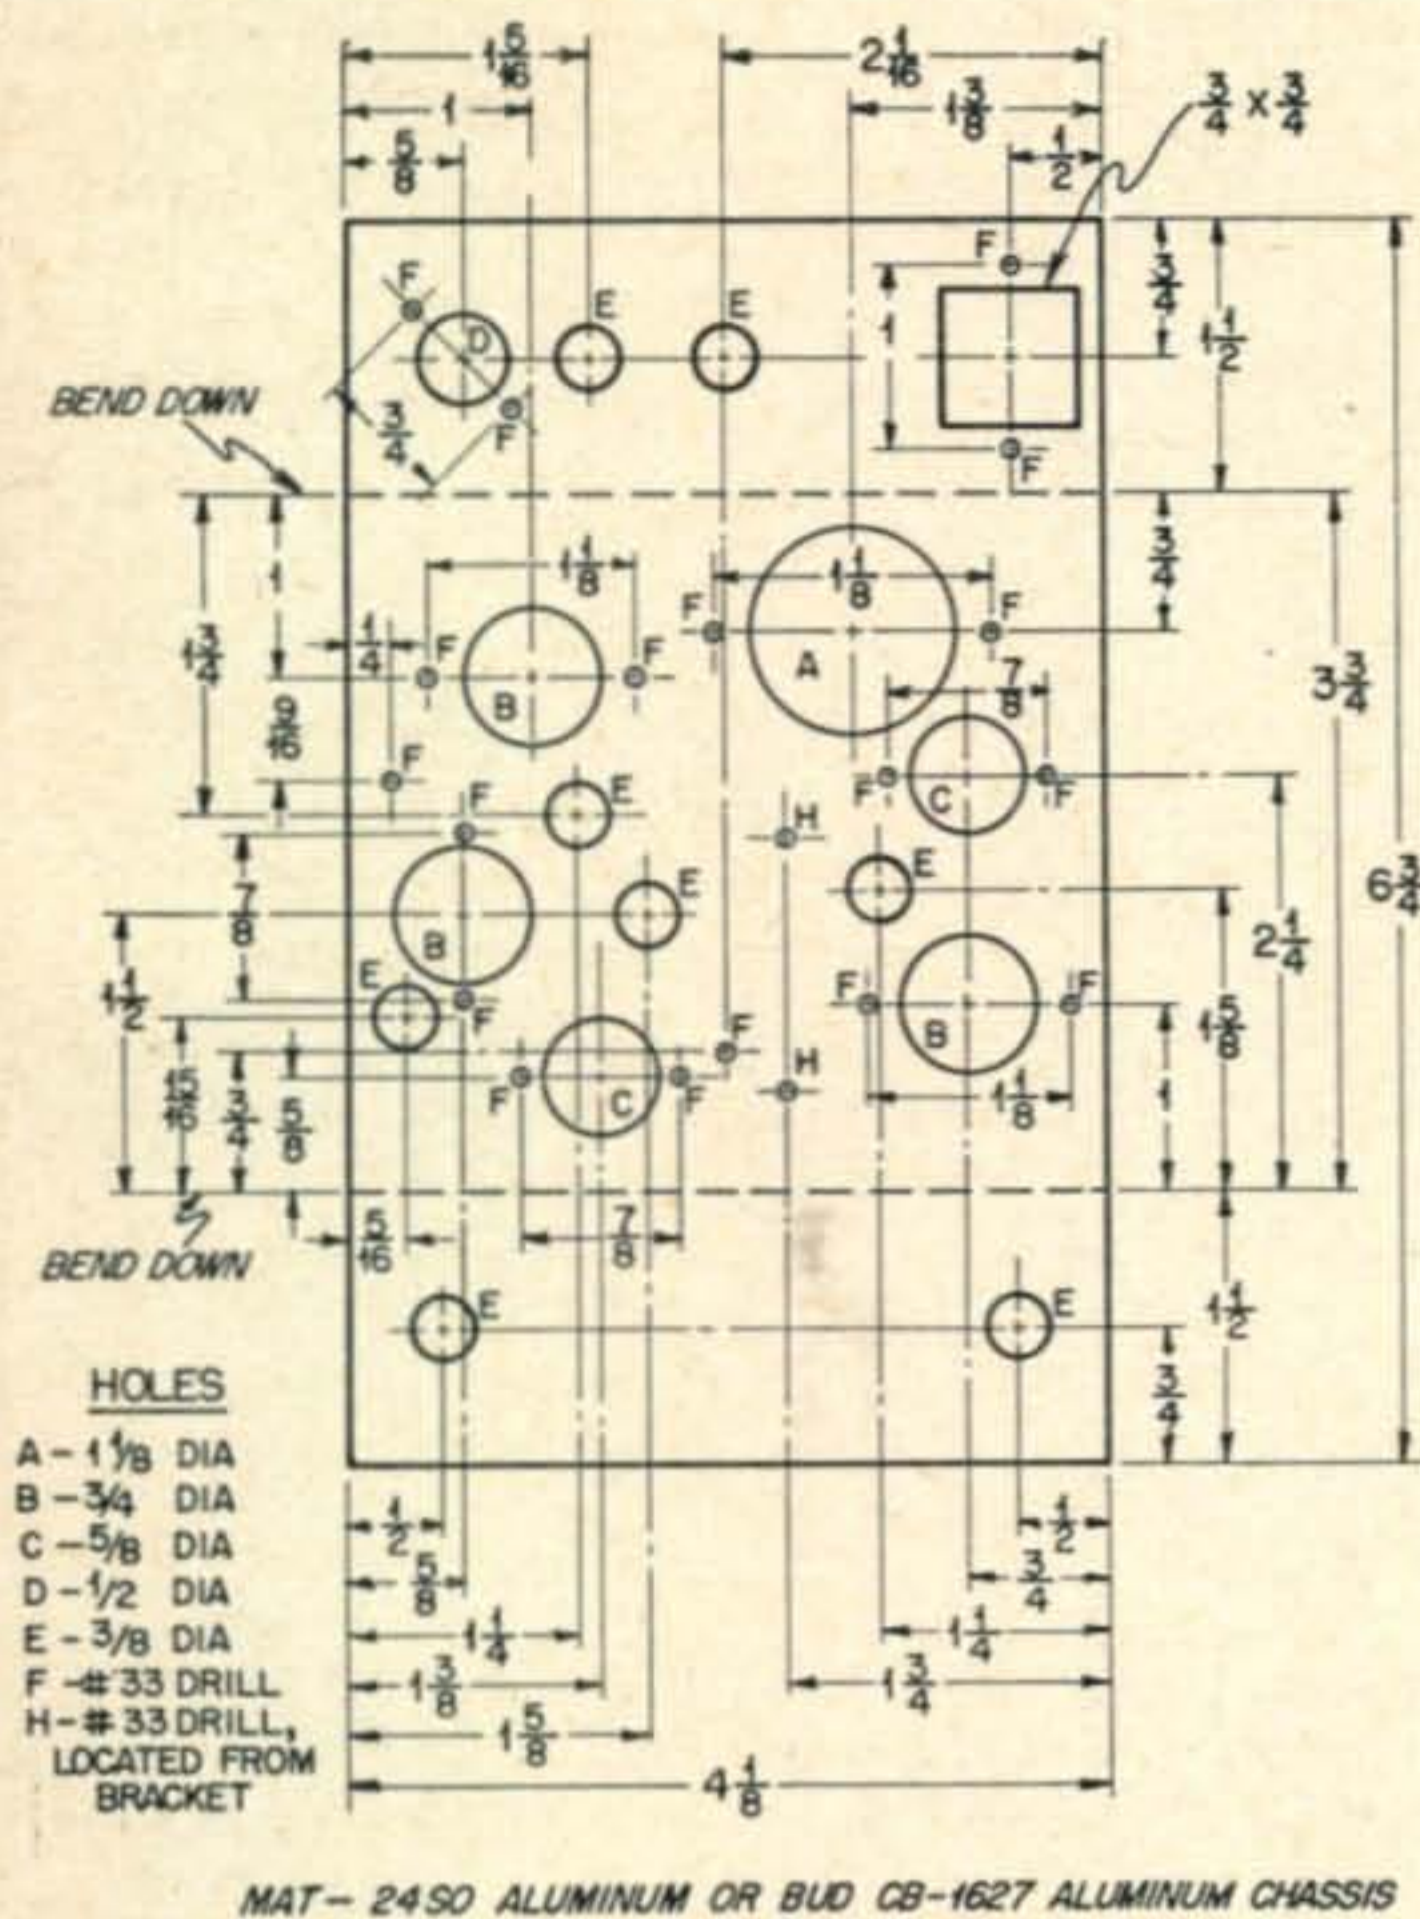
Suggested chassis lay out and drilling plan. The chassis is a BUD #CB-1627 and the cabinet is a BUD #CU-729. The method of mounting is discussed on this page.
